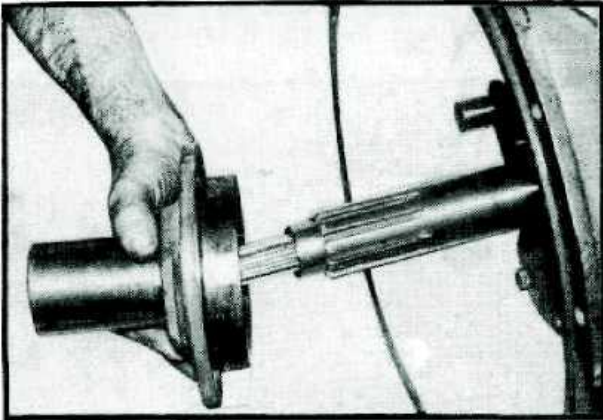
Removing Upper Mainshaft Front Housing to service Oil Seal.
